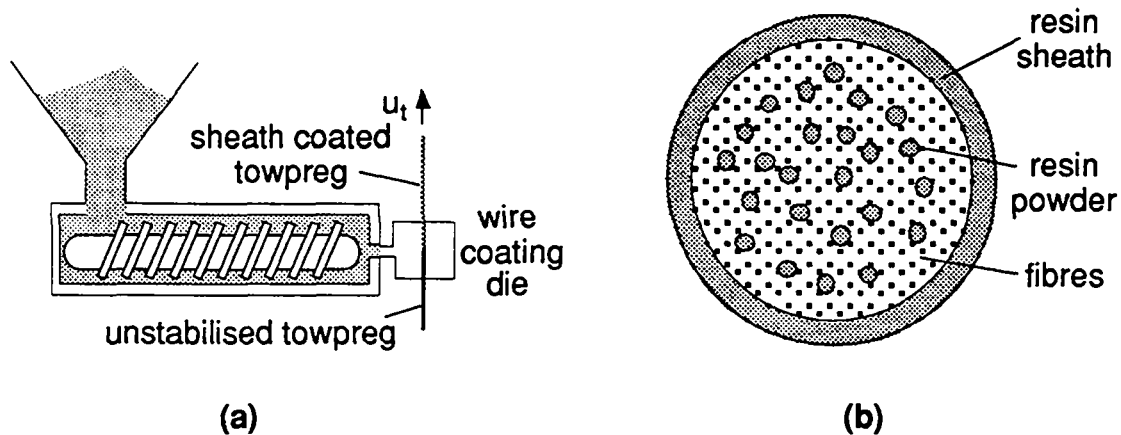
Sheath coating of the powder laden fibre tow : (a) wire coating die; and (b) cross-sectional view of a FIT towpreg (after [23]).
